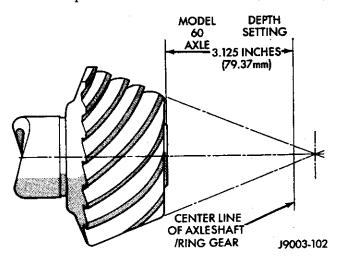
Drive Pinion Gear Standard Depth/Distance
